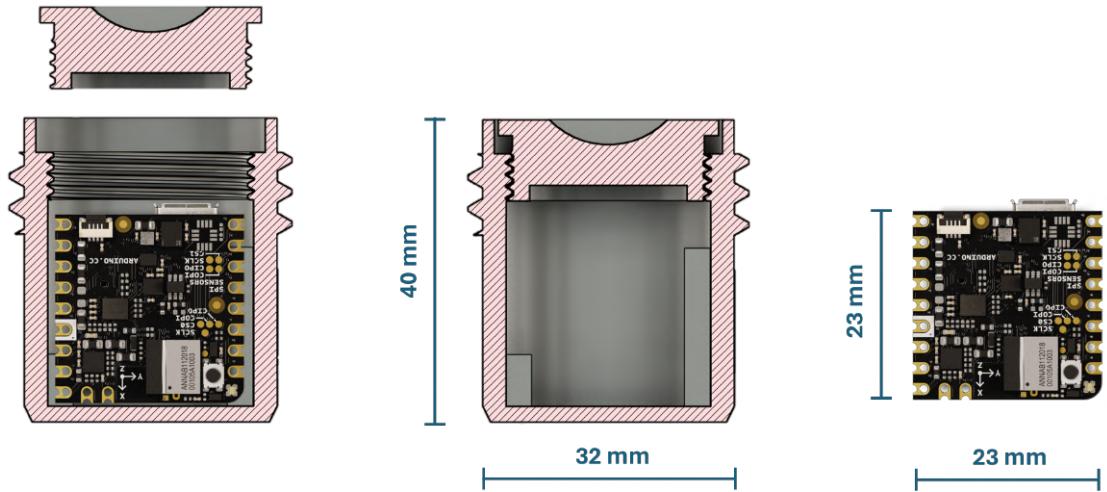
Diagram showing the Arduino Nicla integrated into the 3D printed cylinder which will be placed inside a real apple. The cutaway drawing helps in visualising the interior of the cylinder and how the threaded cap is fastened. Also, the dimensions are shown to give an idea of the envelop size.
